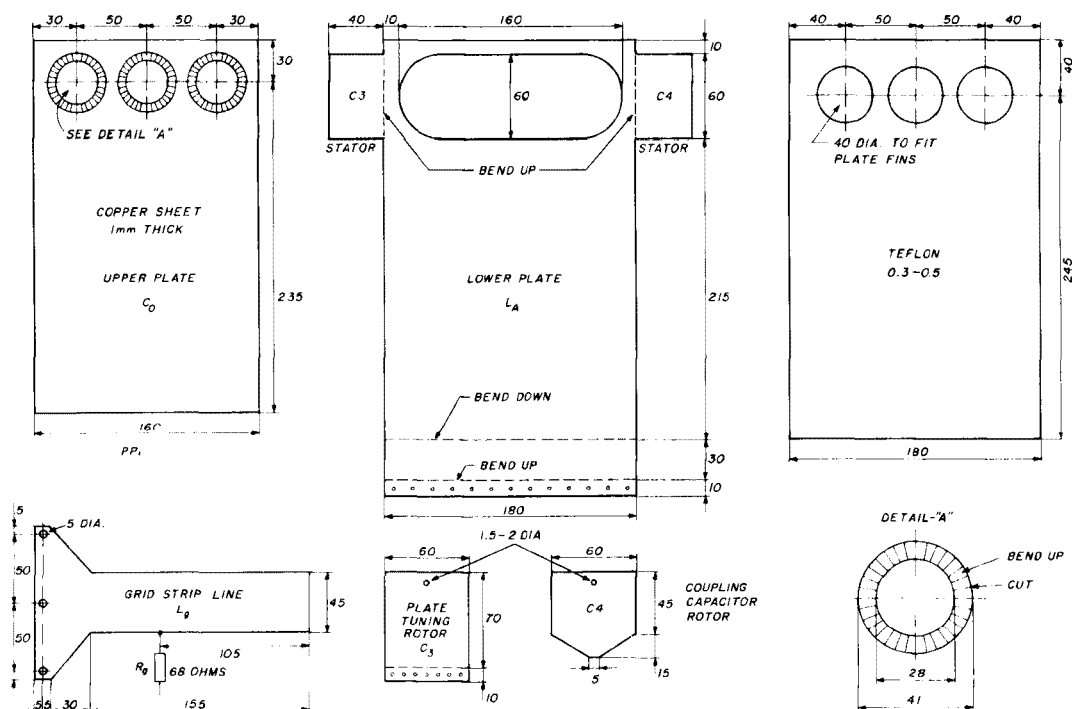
Dimensions are provided for constructing upper, lower plate, teflon insulating sheet, grid stripline, and  $C_3$ ,  $C_4$  rotor plates.
